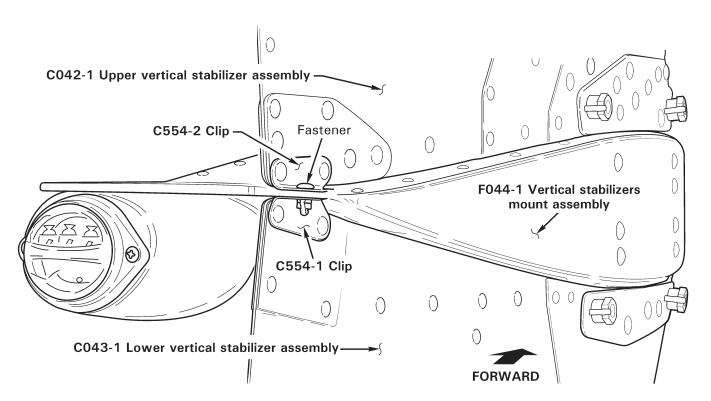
F004-2 EMPENNAGE ASSEMBLY
